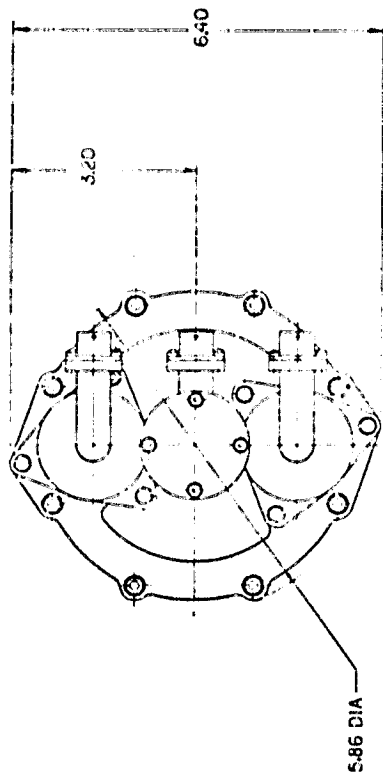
Modulating Valve (ALRC Drawing No. 1193180)
